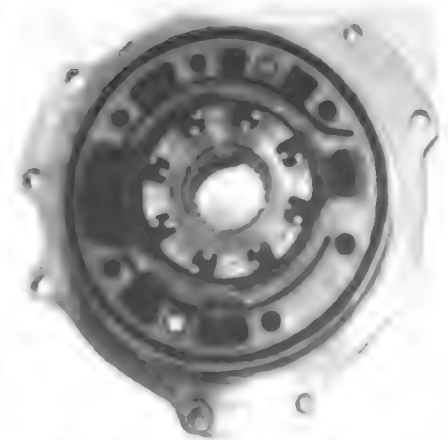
View showing rotor housing and rotor assembly correctly installed on pump body.
